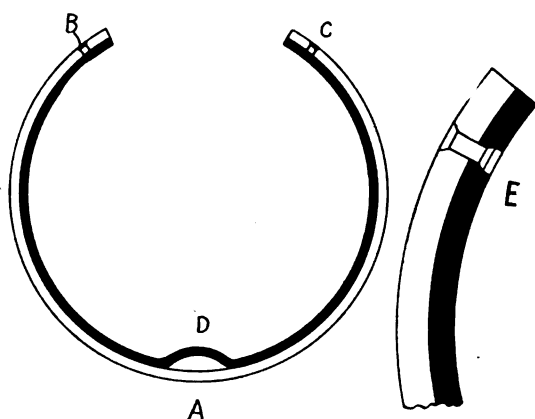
Showing How the Fabric Should Be Applied to the Band.
